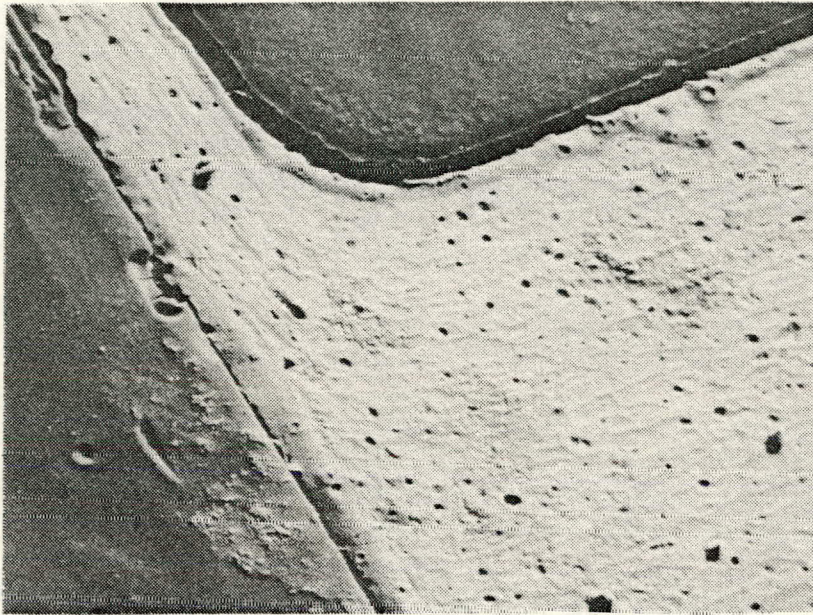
Workpiece Grain-Flow Lines and Burr in Drilled 6061-T6 Aluminum (Magnification 150X)
